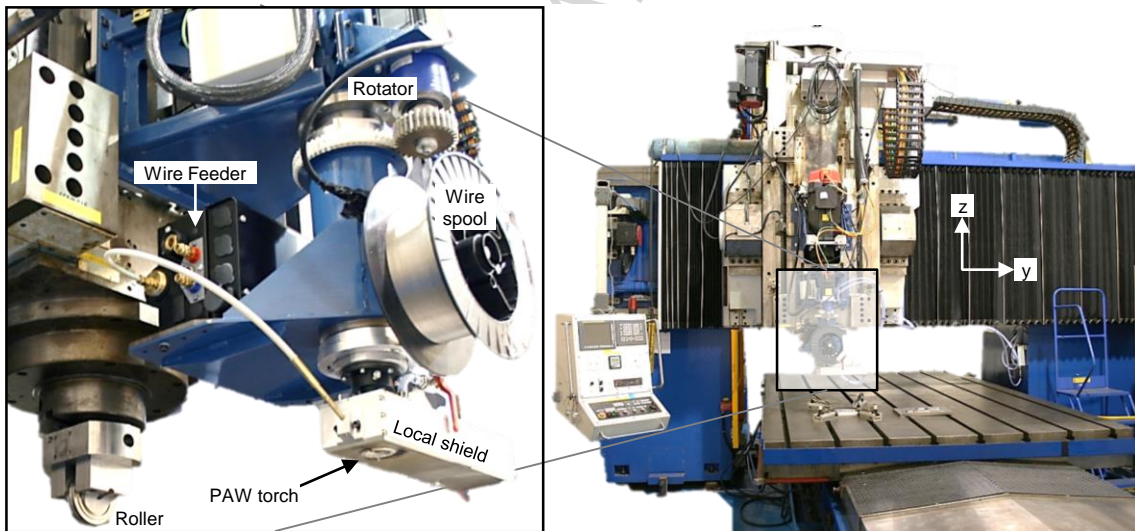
The “HiVE” build platform: WAAM deposition unit retrofitted with a rotator to the z-axis of a FSW machine; the FSW tool is replaced by a customised roller unit.
